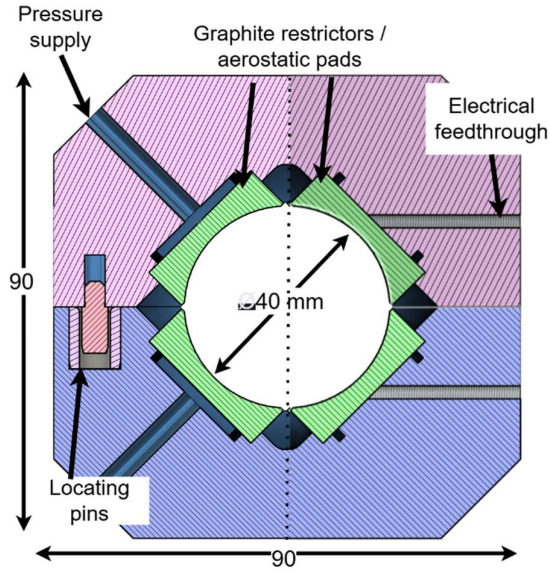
Diagram of the investigated bearing. Each corner had a pressure supply port with M5 thread. The picture is a section from front with two section depths at the dotted line. The locating pins were mounted to ensure alignment with one side having a cylinder pin and the other a diamond shaped pin. The electrical feedthroughs were 2.5 mm in diameter piercing to the graphite off to the side from the pressure supply.
